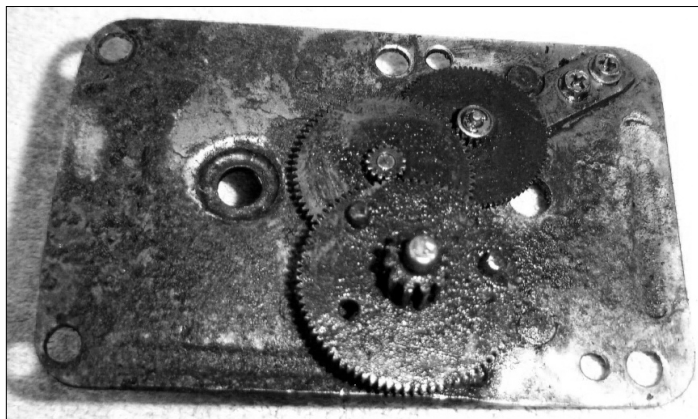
This is the gear plate top view. The motor connects through the bottom and the main gear connects from the top. It is very rusty from water leaking down from the top bearing.
